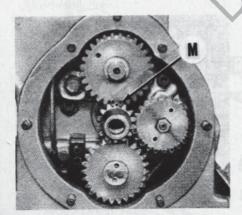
View showing location of timing marks (M) on crankshaft and camshaft gears.
